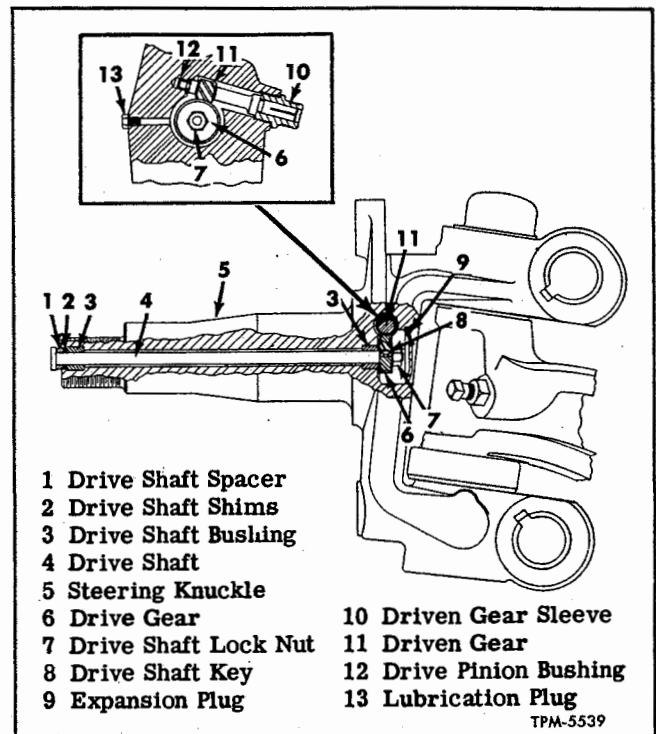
L.H. Steering Knuckle With Tachometer Drive
